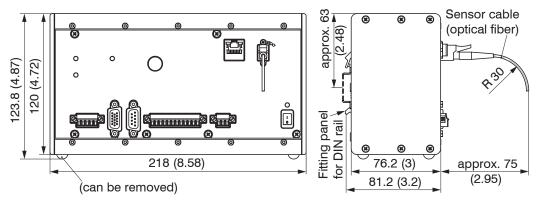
Dimension drawing of controller IFC2451/2461/2471LED, dimensions in mm, not to scale
